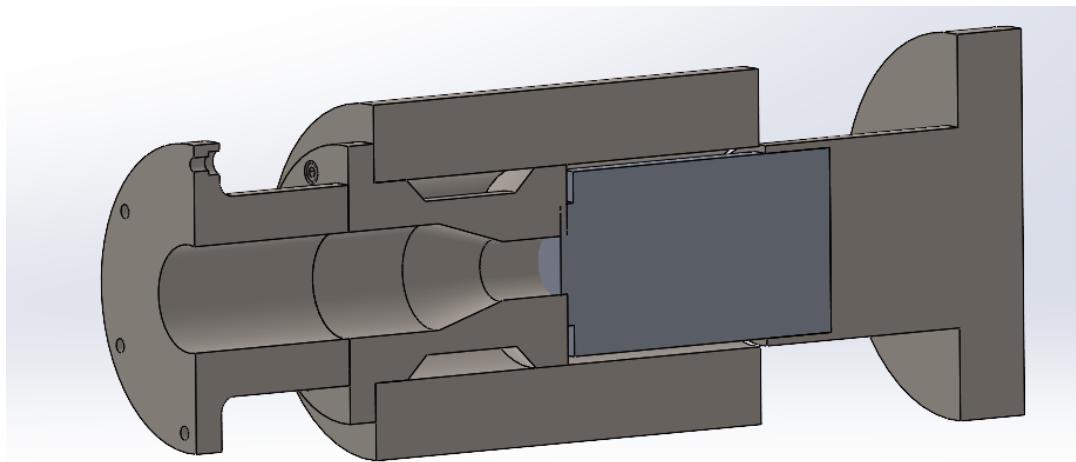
Cross-Sectional View of the Final assembly of the Die
